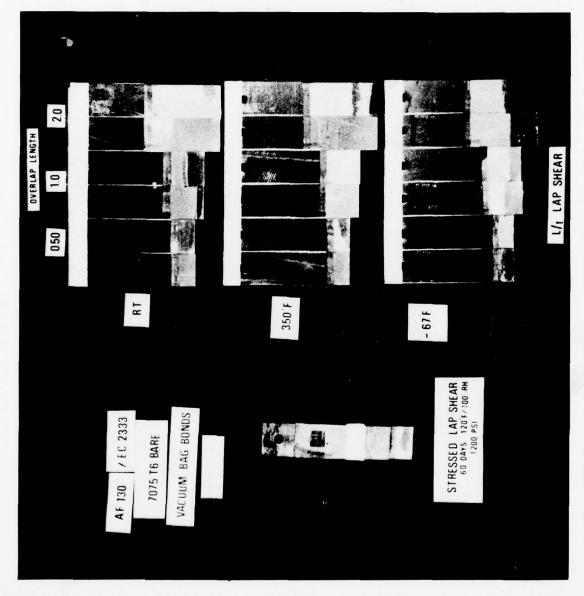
Specimen Failure Surfaces—AF 130, PasaJell 105, Vacuum Bag Bonds
